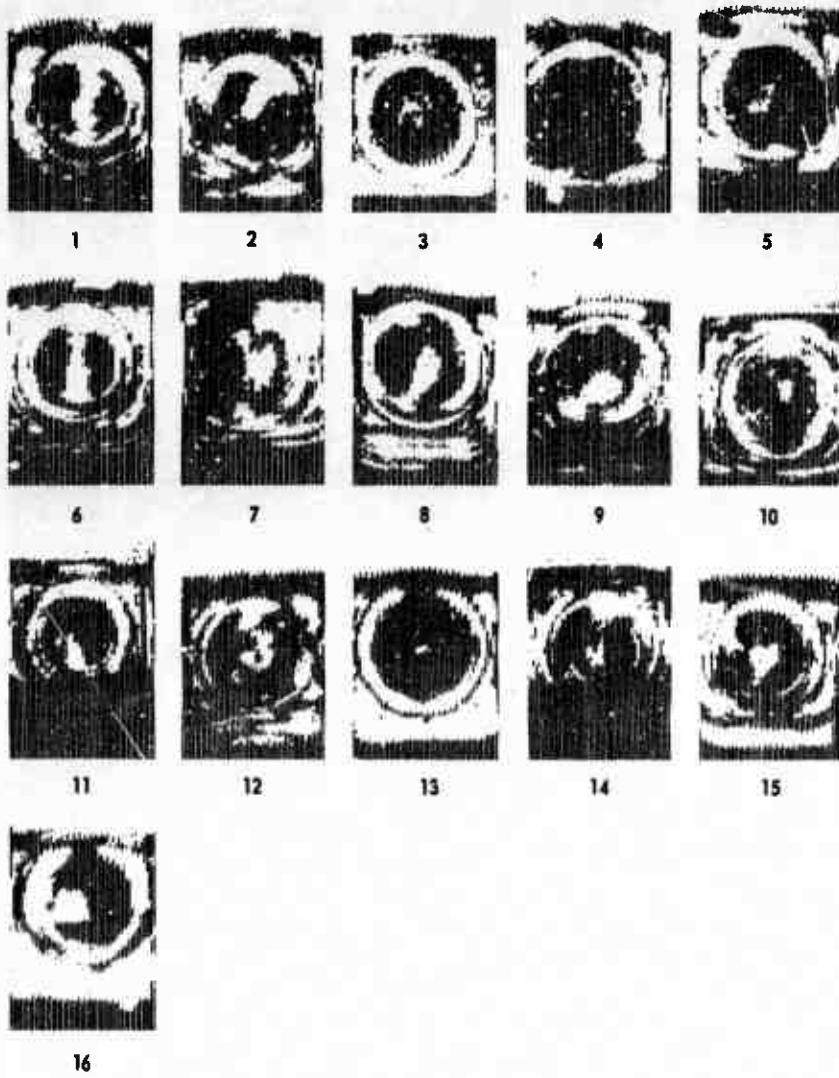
C-Scan Record of Series 10 Welds.
